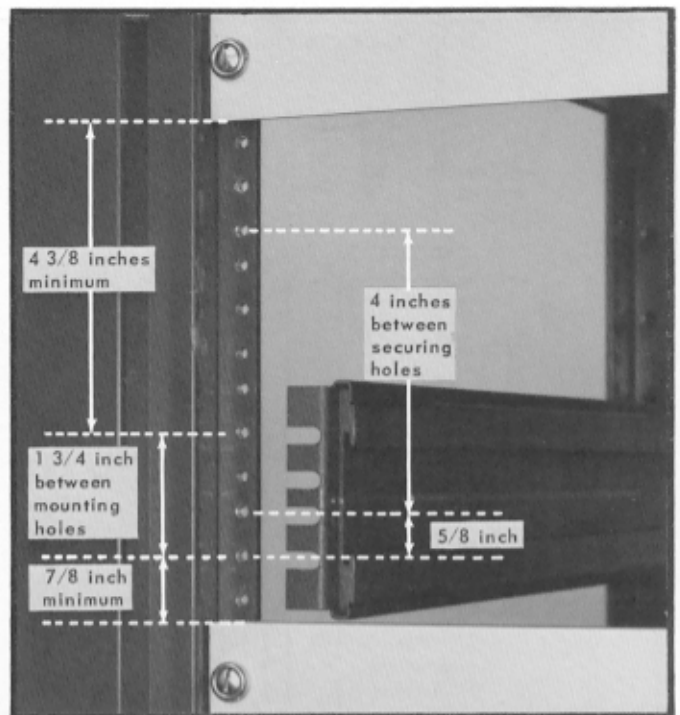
Vertical mounting position for front end of slide-out tracks.
